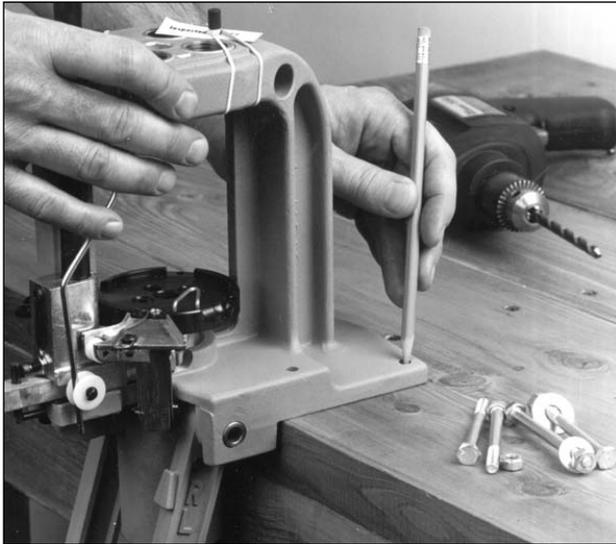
Using the machine as a template, mark and drill four 1/4 inch holes allowing 12 inches on each side for your work area.
